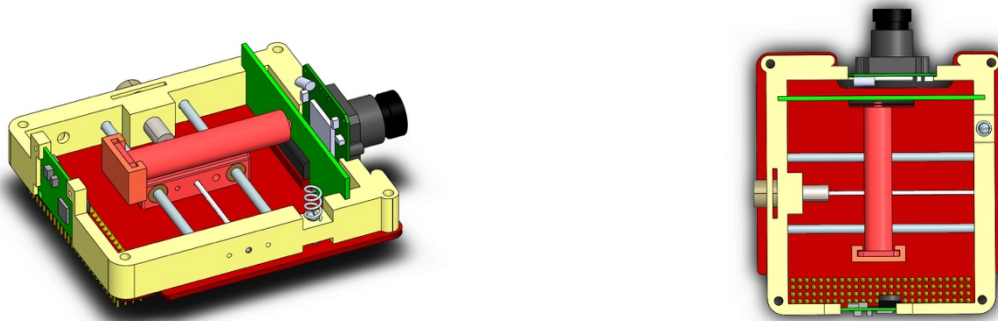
Isometric and top view of wax-plug nozzle design CADs
